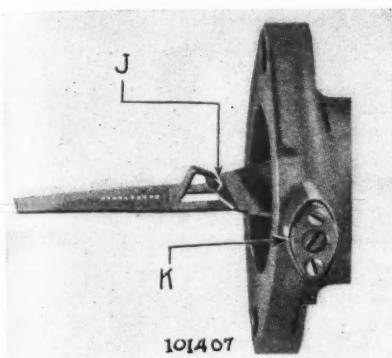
Removing auxiliary air valve spring from Cadillac carburetor
